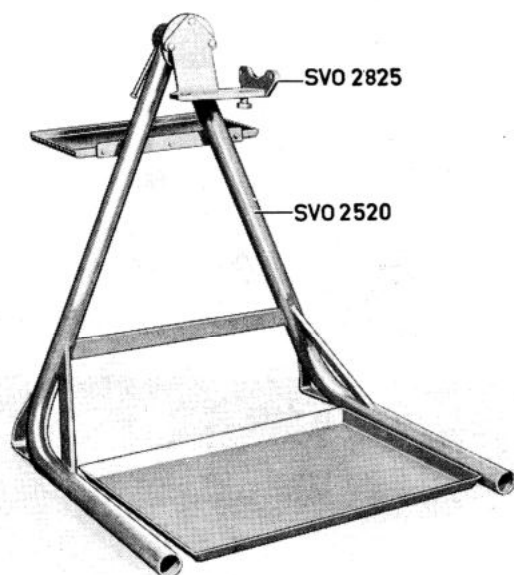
Stand SVO 2520 with fixture SVO 2825
